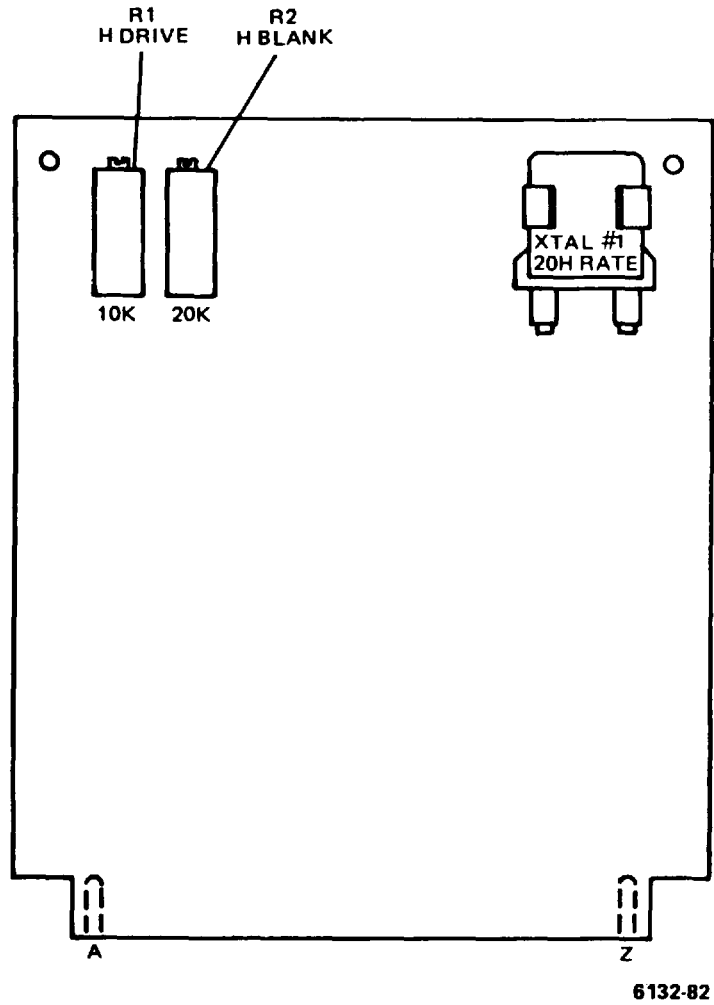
Drive/Blanking Circuit Card Adjustments
